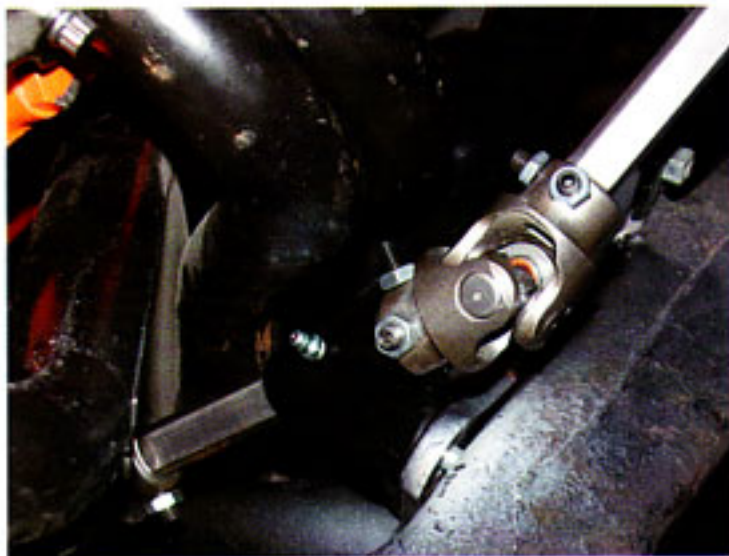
With the third U-joint and support bracket installed, there is plenty of room for the header. This bracket may be used on a 1 or 2-piece frame and with big block or small block engines. Good luck!
